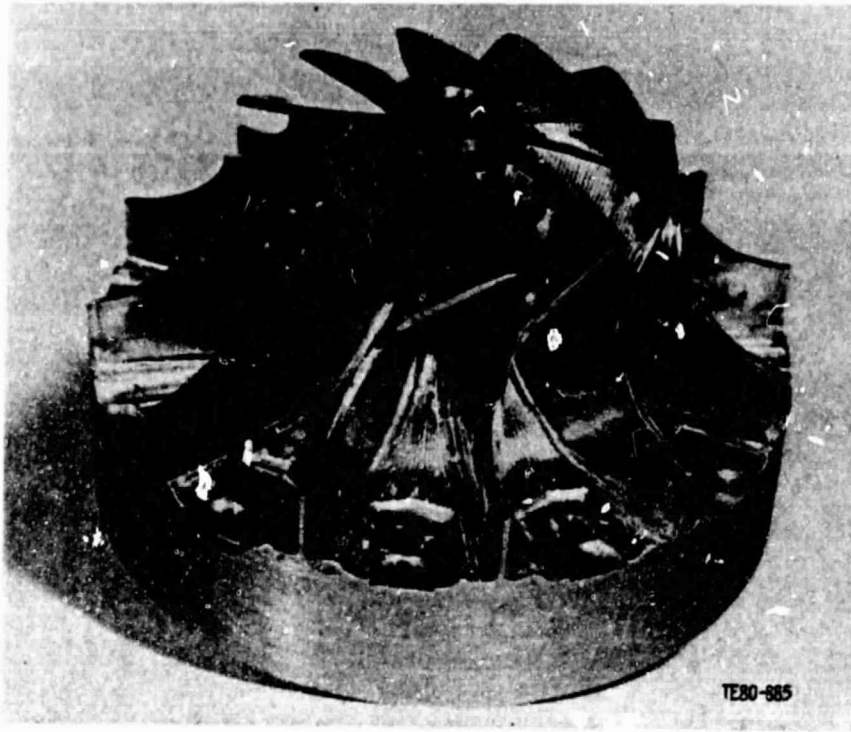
Photo of Rough-Machined Gasifier Turbine Wheel.
